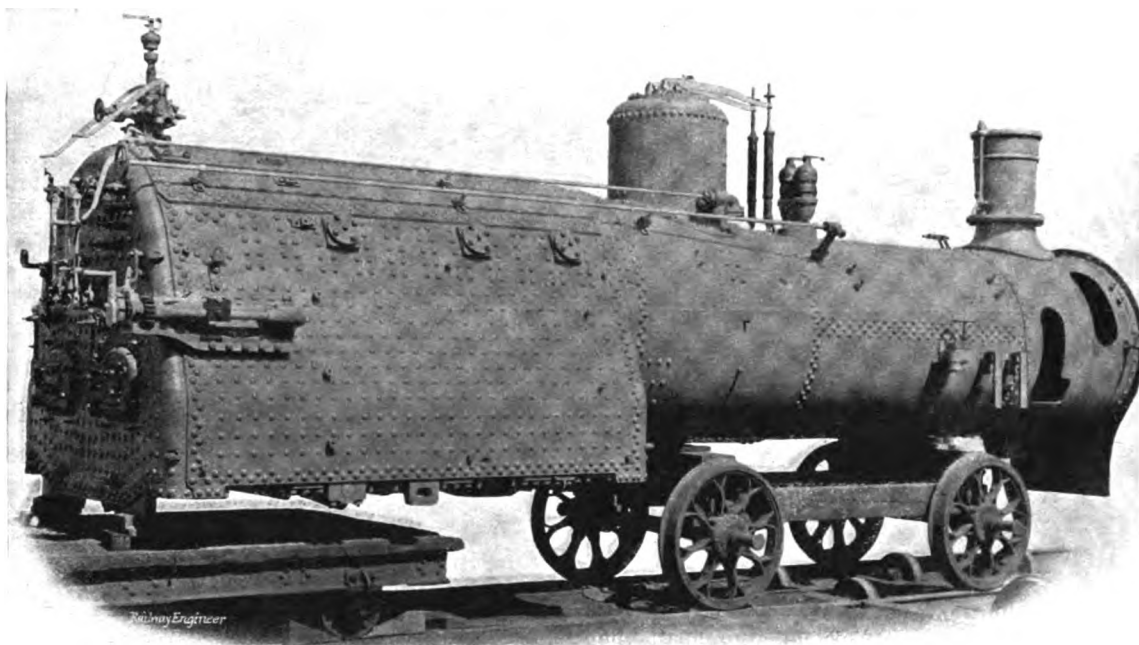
Boiler for Engine illustrated by Fig. 6.
